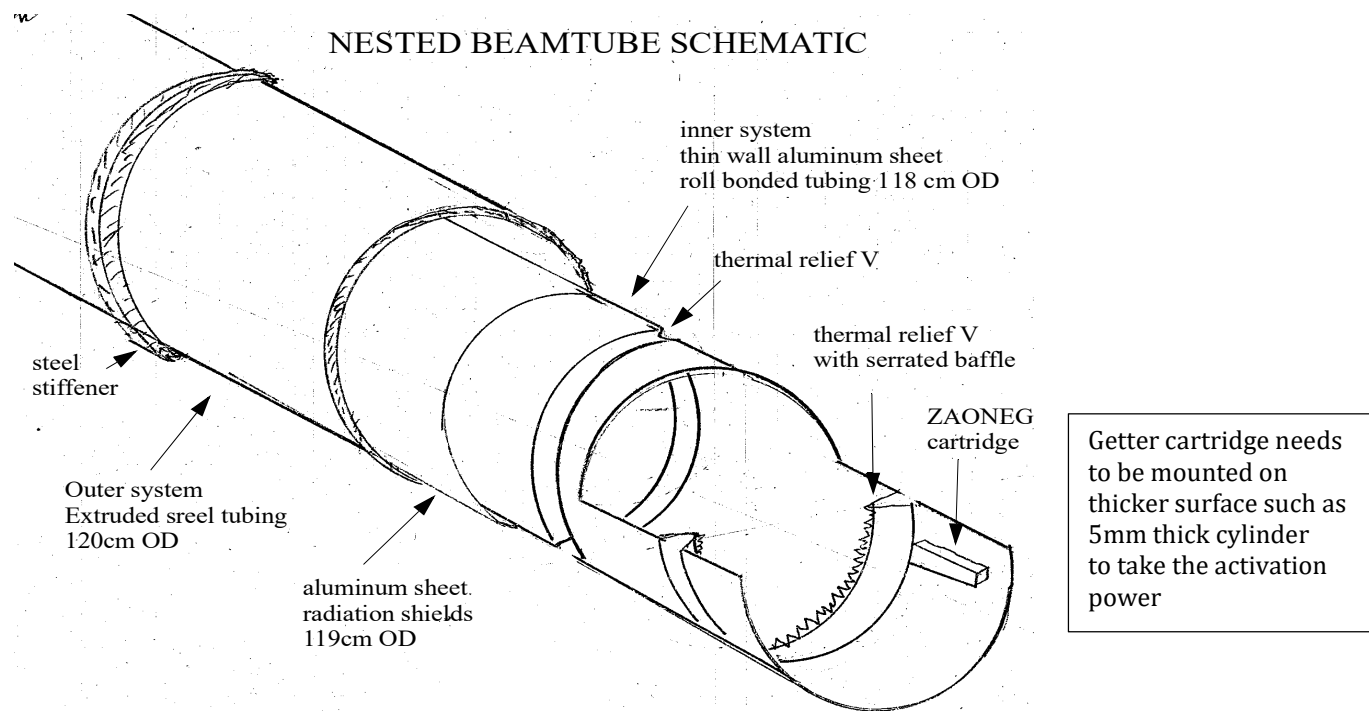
Schematic of the nested system. The outer tube is extruded standard 48" OD steel tubing . Two concepts are being carried, one uses 3/16" wall with periodic stiffening rings on the outside to avoid collapse. The other is to use 3/8" wall, the standard size for the natural gas industry, without stiffening rings. Later in the design, depending on the site, the thicker wall may have a cost advantage as it allows less secure enclosures for the tube (more economical, more easily punctured by bullets). The hydrogen outgassing for the outer system at 300K is assumed to be 10^{-11} torr liters/sec/cm² and the water load at construction is assumed as 150 monolayers (5×10^{-3} torr liters/cm²). The inner system is composed of aluminum sheet 1/2 mm thick. It is spiral roll bonded (or by other cold welding techniques) in a continuous helix at the detector assembly site. A thermal relief V is rolled into the tube every 2 meters. The V helps to stiffen the inner tube but also provides places to mount serrated edge baffles to reduce diffracted propagation of the laser light in the tube. The V also provides places to hide ZAO getter pumps and wiring to avoid scattering of the laser light. The inner wall of the aluminum needs to have low reflectivity for 1 and 2 micron light. The outer wall of
